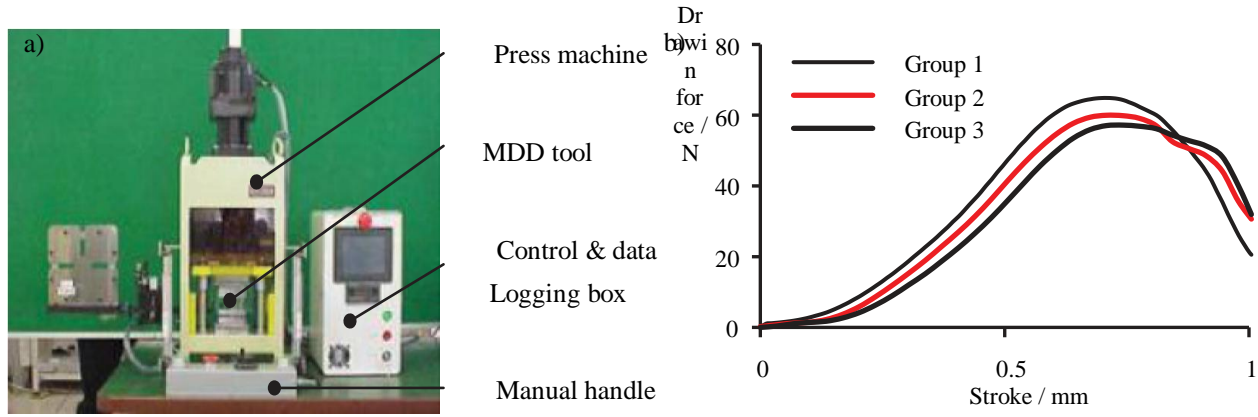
(a)Micro deep drawing machine and (b) Drawing forces of each material group.
